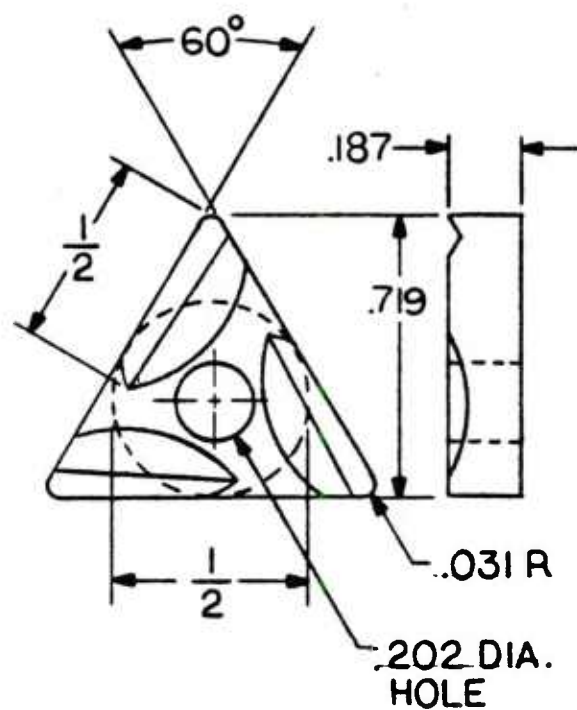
Geometry of tool holder used with ultrasonic tool post.
